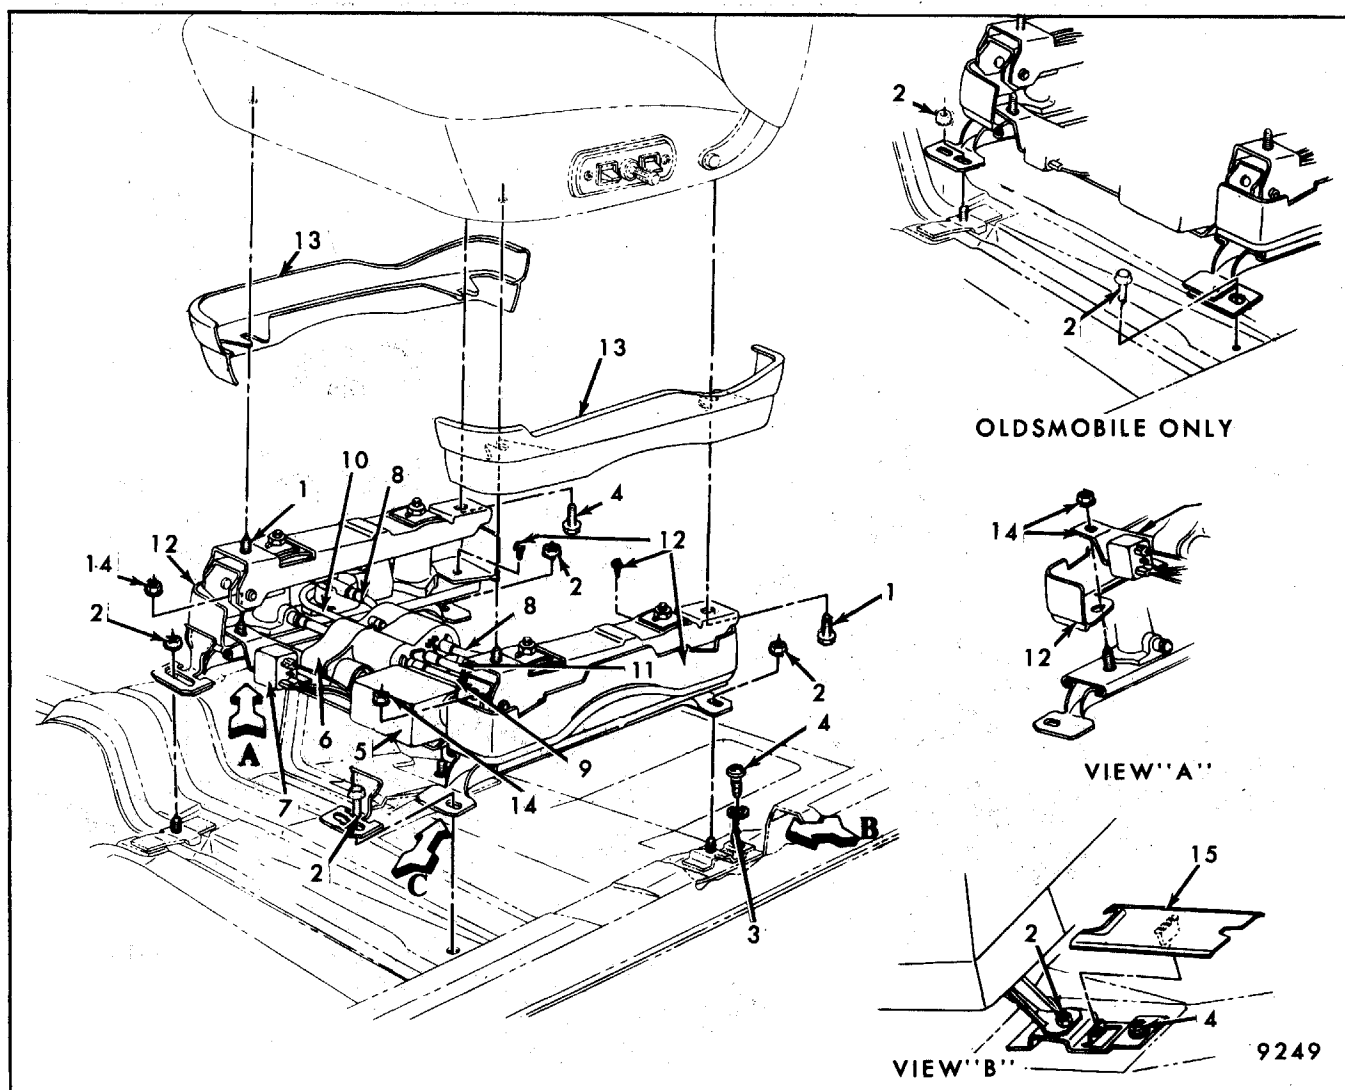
"A and X" Body Six-Way Power Operated Bucket Seat and Adjusters
